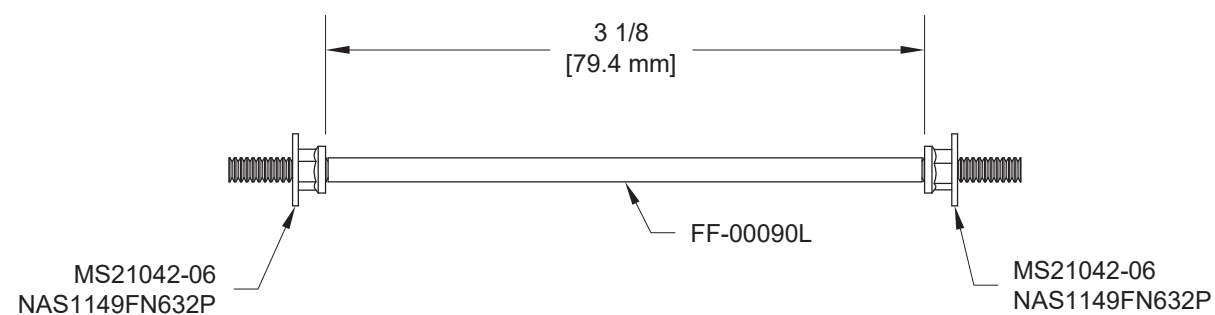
HEAT MUFF ROD ASSEMBLY
